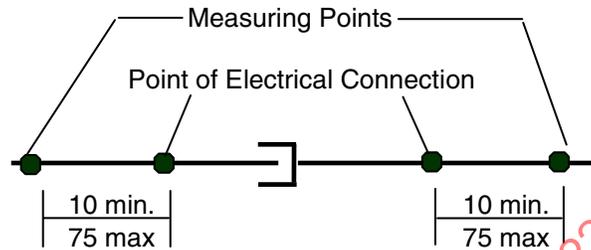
CONNECTION RESISTANCE CABLE TO CABLE
